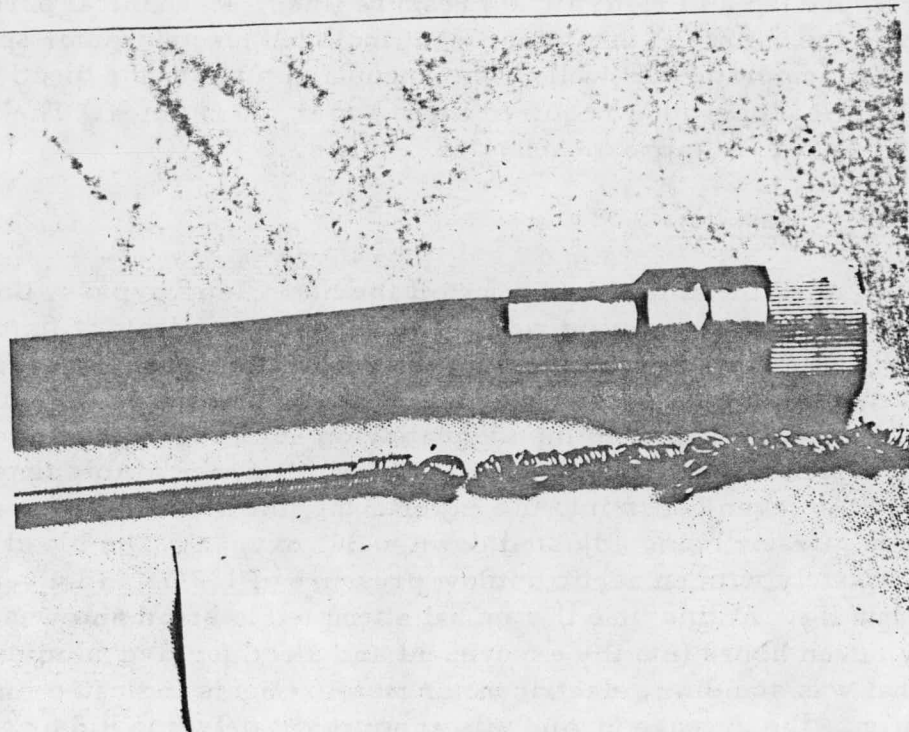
View showing point of failure of drive shaft relative to position in shaft housing.
